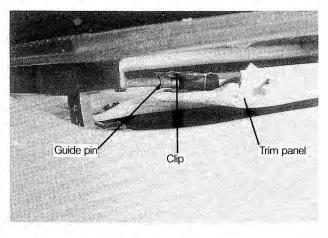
Rear guide pin engaged in sunroof trim panel clip. Sunroof shown raised for clarity.
